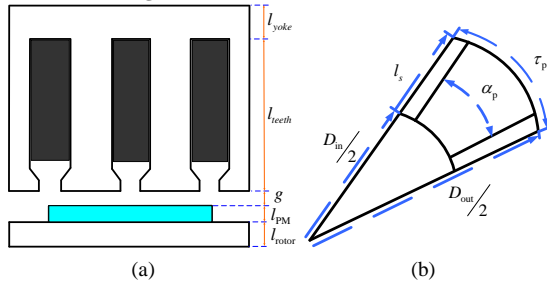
Definition of the main geometrical dimension of AFPMSG machine; a) axial view, b) radial view.
